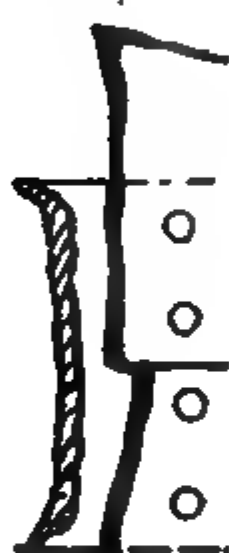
ORDINARY DOUBLE-RIVETED LAP JOINT.
